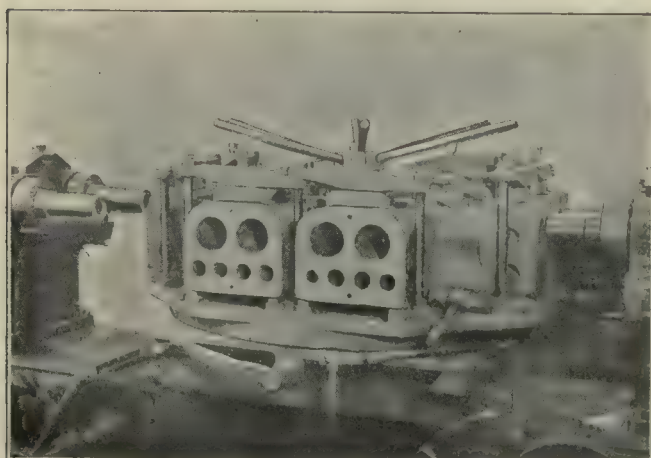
THE METHOD OF BORING THE CYLINDERS
